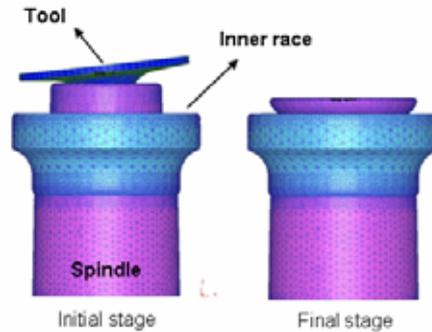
FE model for orbital forming of spindle bearing assembly /6/.
